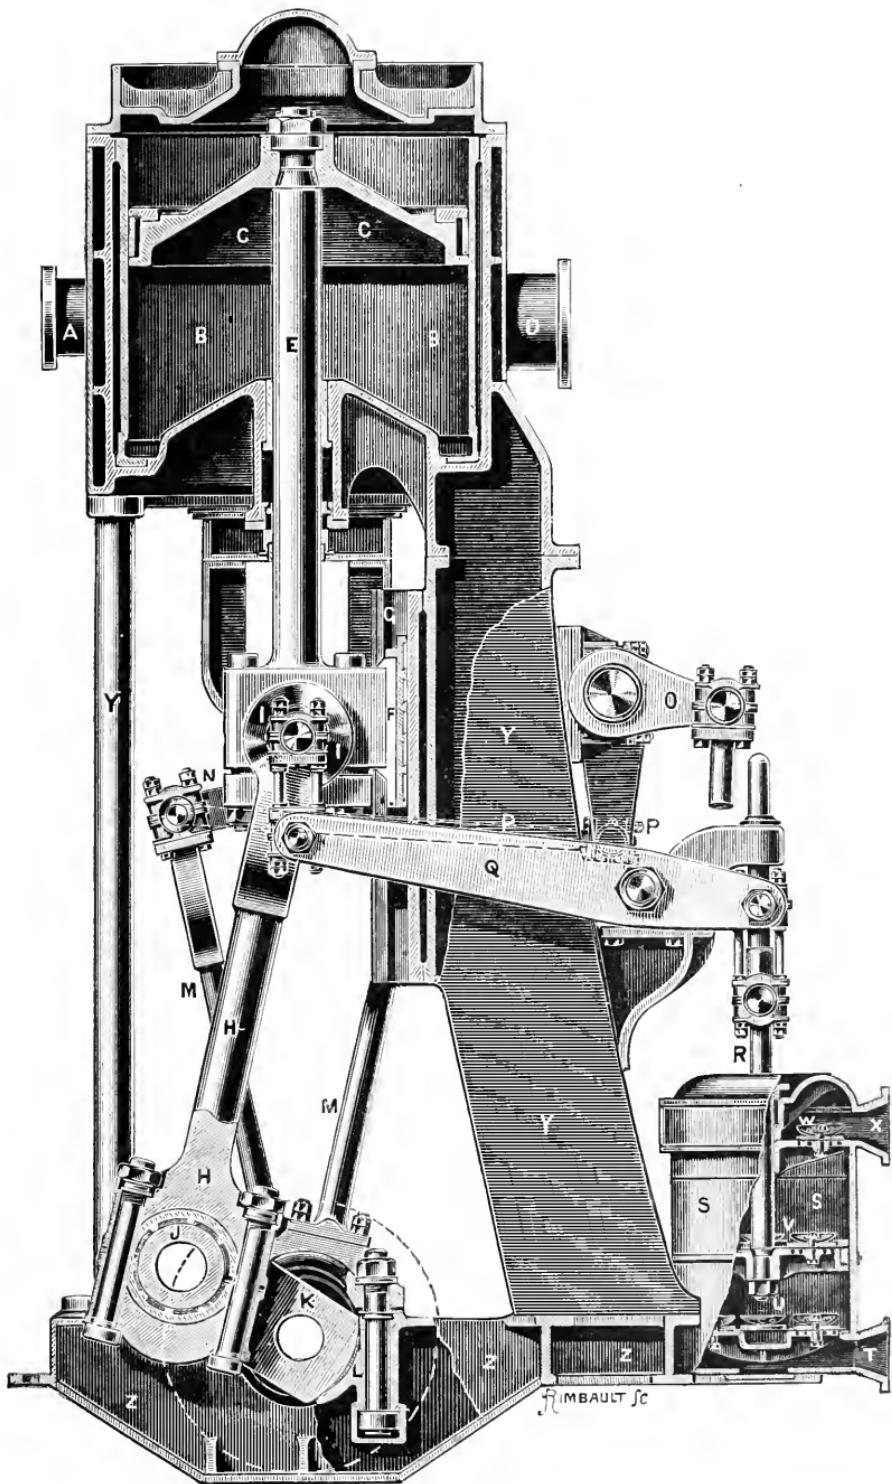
SECTIONAL ELEVATION OF ENGINE.
